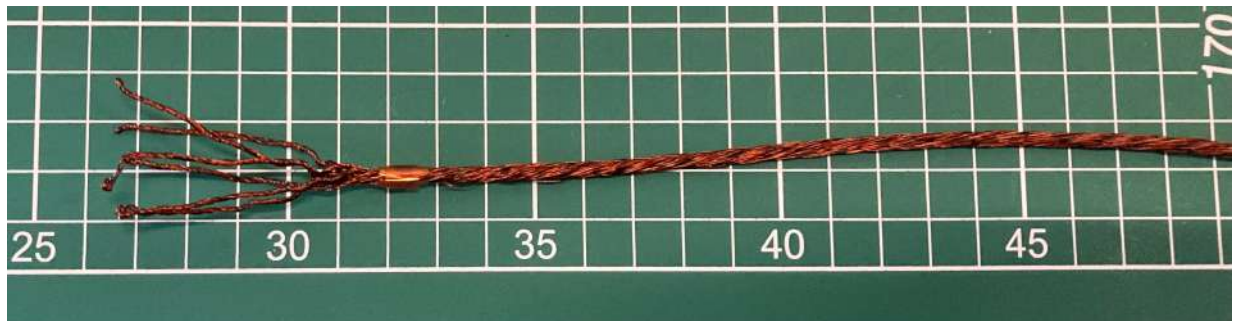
Micro-twisted pair cable directly after bundling in the rope machine
